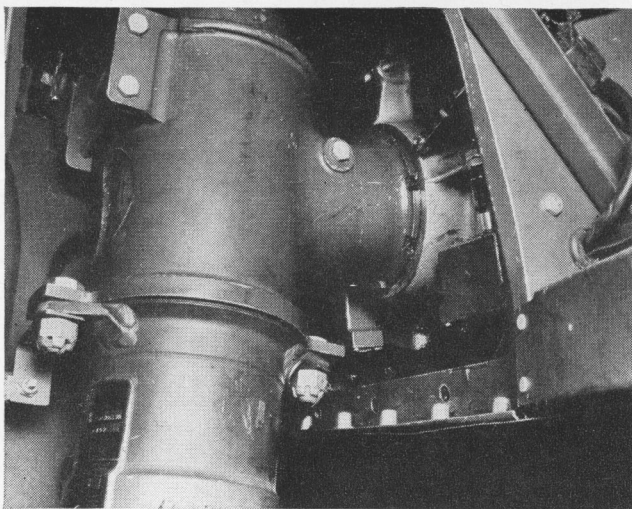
Close-up of the main landing gear strut attachment to the spindle at the rear beam of the outer wing panel.
